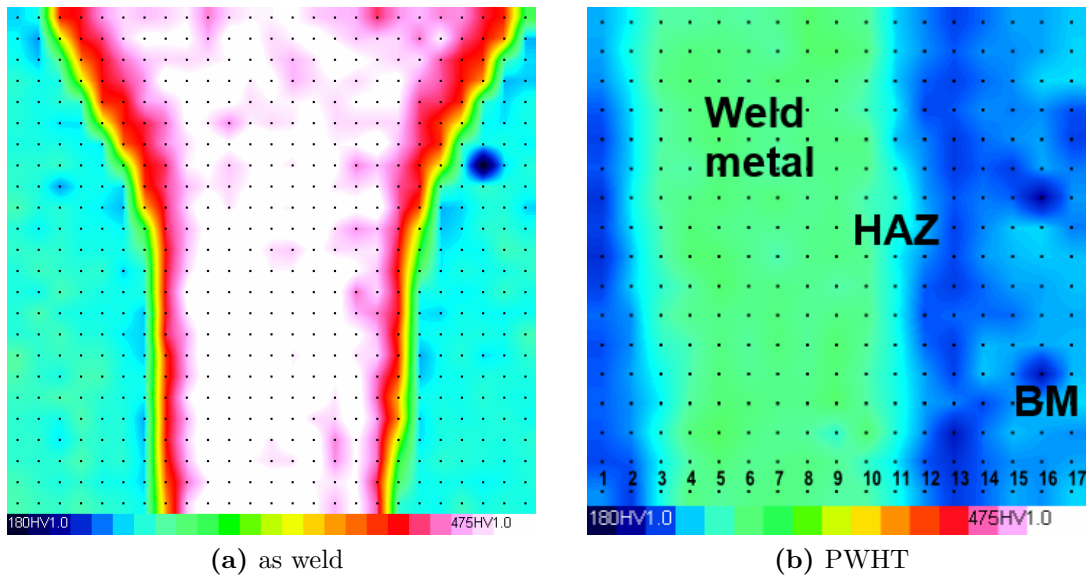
Pseudocolored hardness map of the final butt weld in (a) as-weld and (b) PWHT condition.
